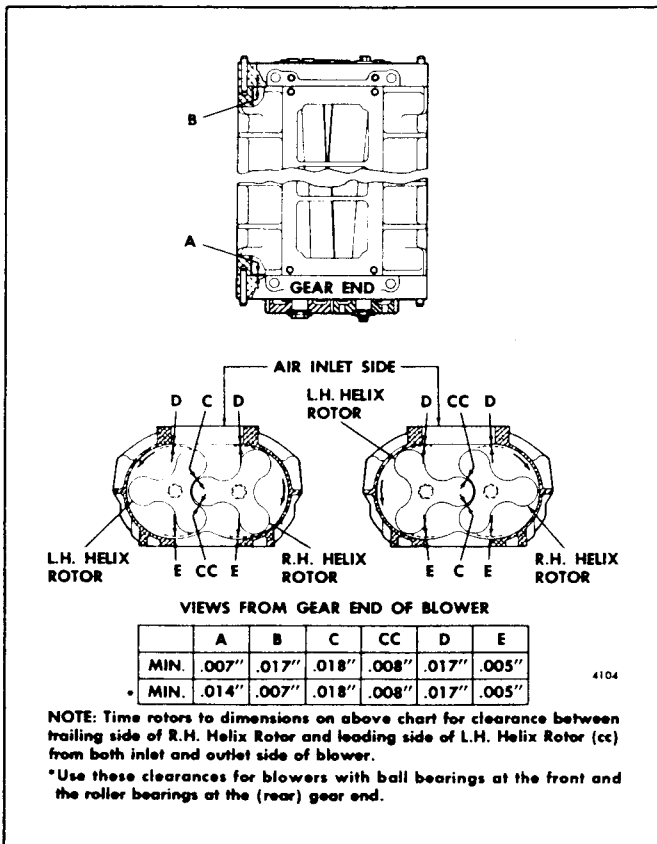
Measuring Clearance Between Blower Rotor Lobes
